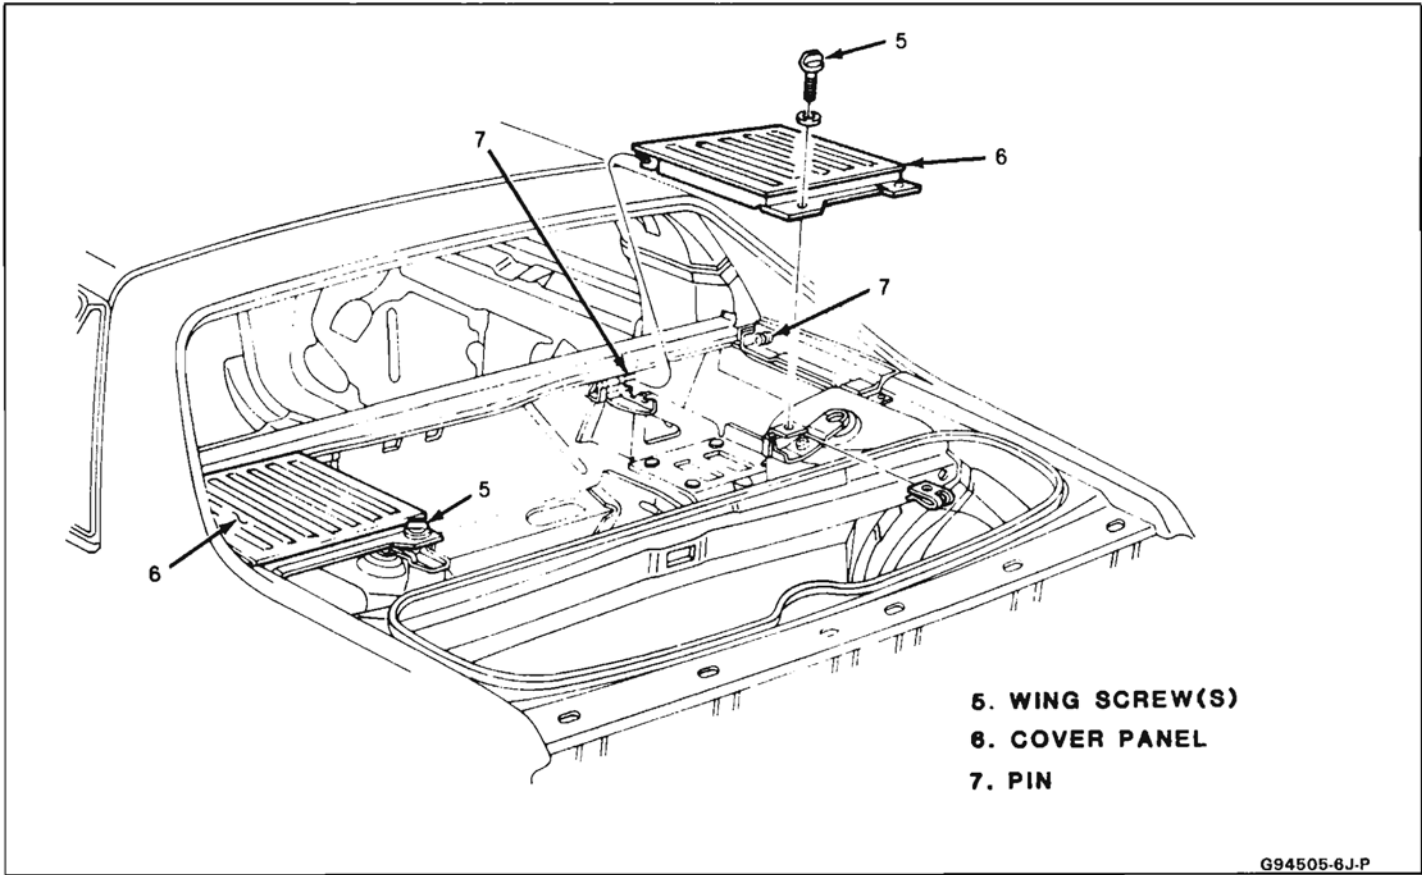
Installing Rear Compartment Side Panel Cover - 37 Style Shown, 97 Style Similar
